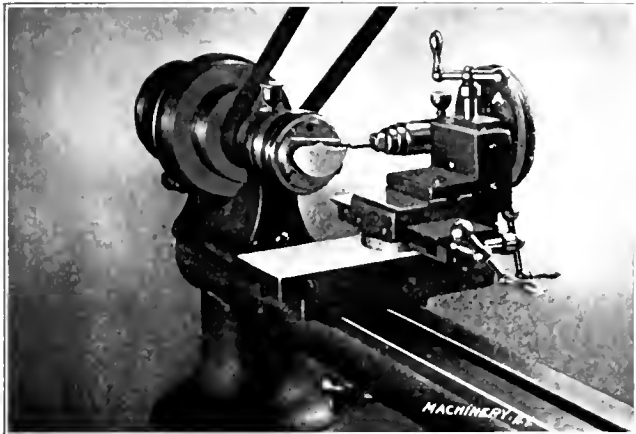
Milling Attachment for Bench Lathe used for Milling Punches, Dies, etc.
